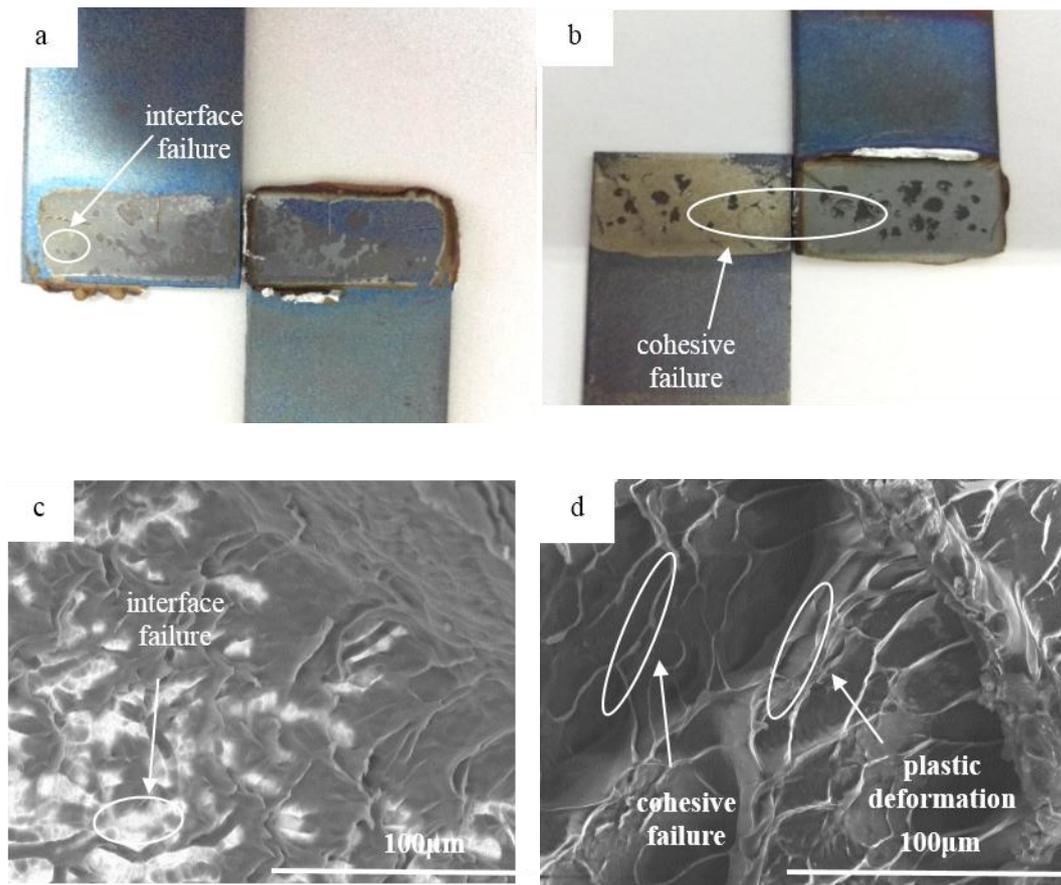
Morphology after fracture of single lap tensile shear specimens
